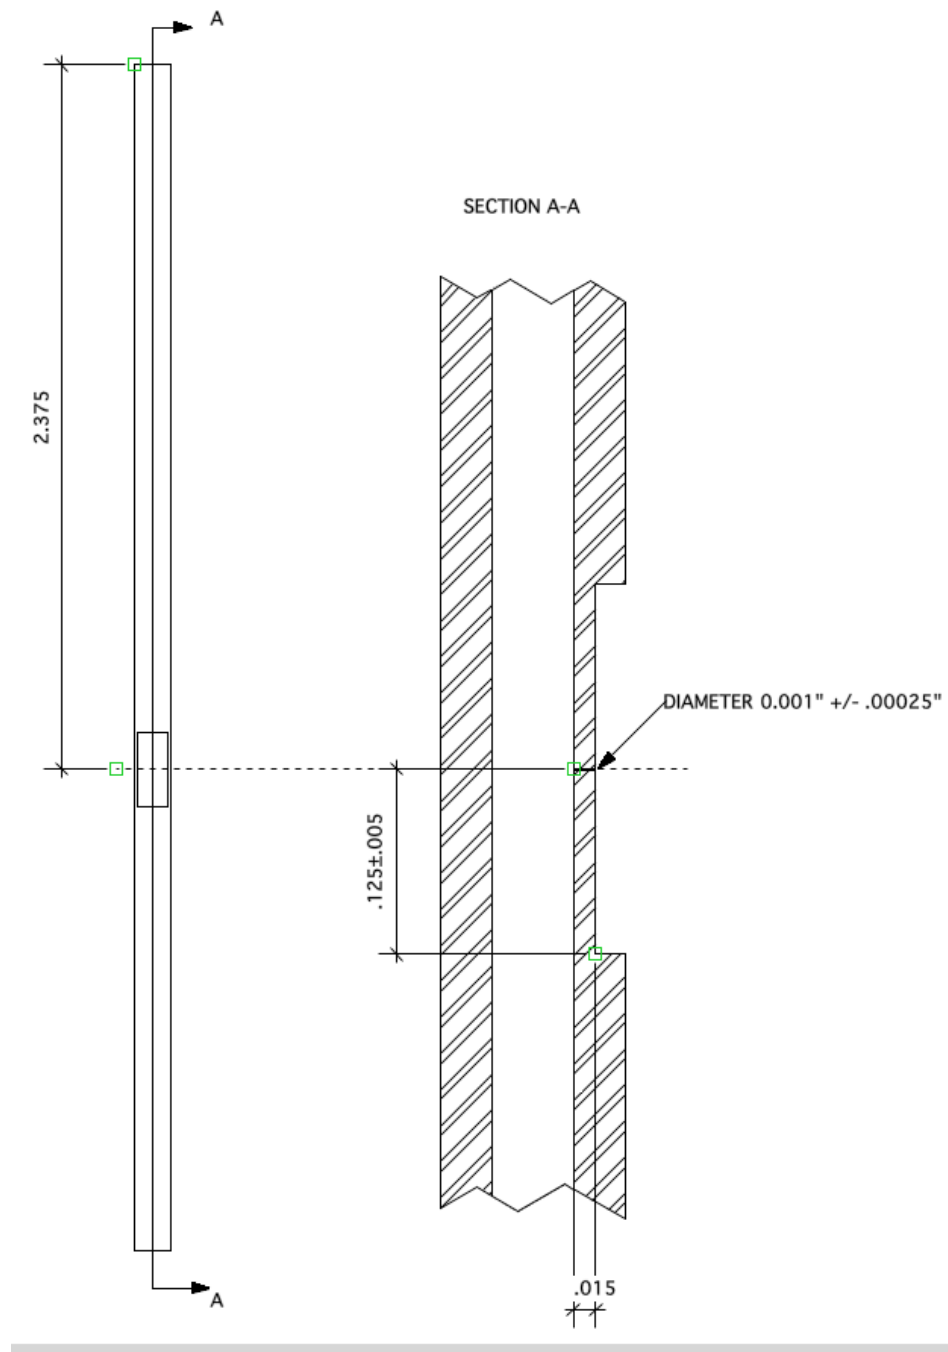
Technical drawing for the fabrication of the inconel molecular beam nozzle.
